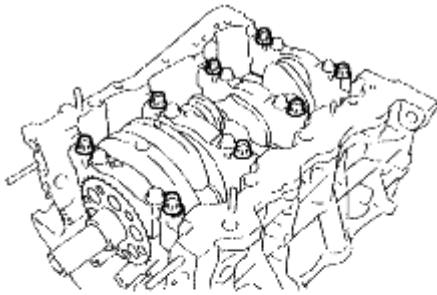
Tapping Bearing Cap To Ensure Proper Fit
